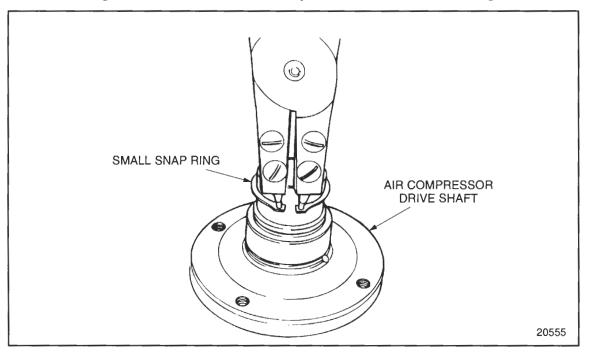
Roller Bearing Inner Race Snap Ring Removal
